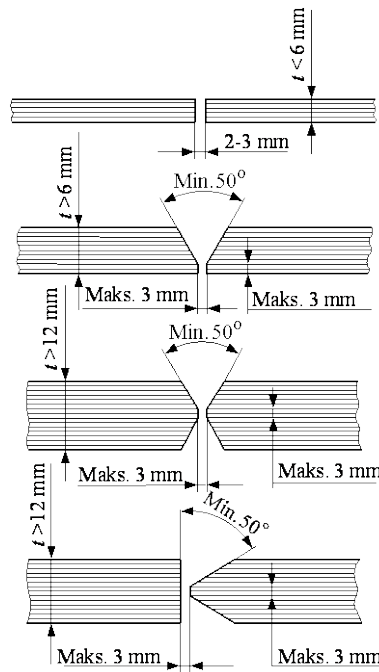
Edge preparation for manual butt welding
